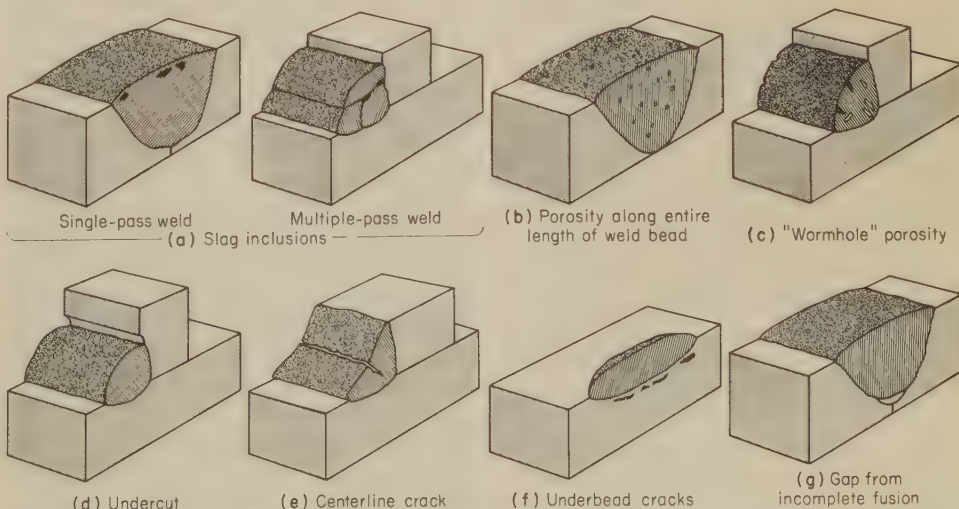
Appearance and location of several common types of defects that can occur in welds made by the shielded metal-arc process
